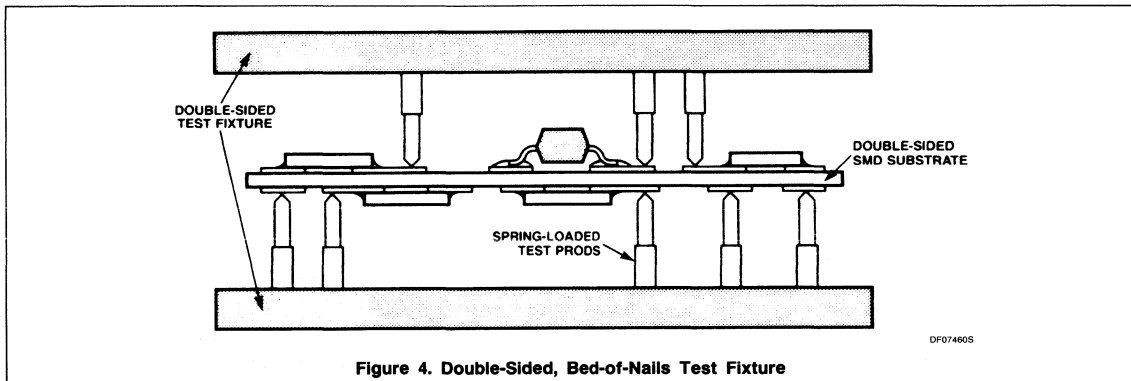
Double-Sided, Bed-of-Nails Test Fixture
